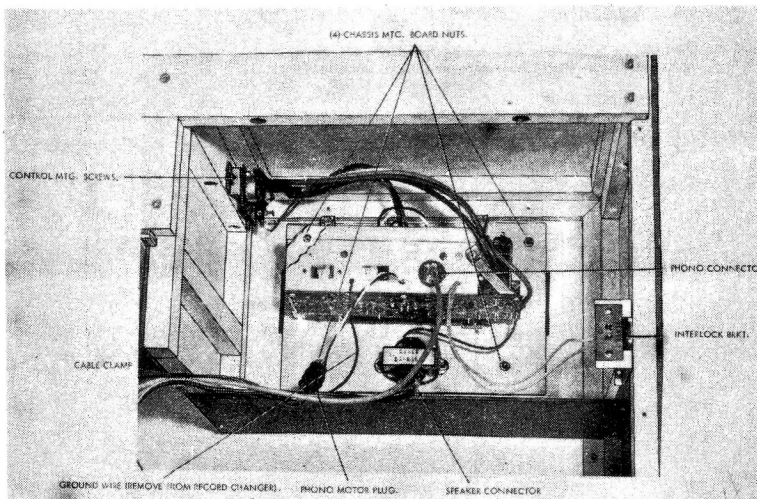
Chassis Mounting to Cabinet. (Part of Chassis cut out to show mounting nuts).
